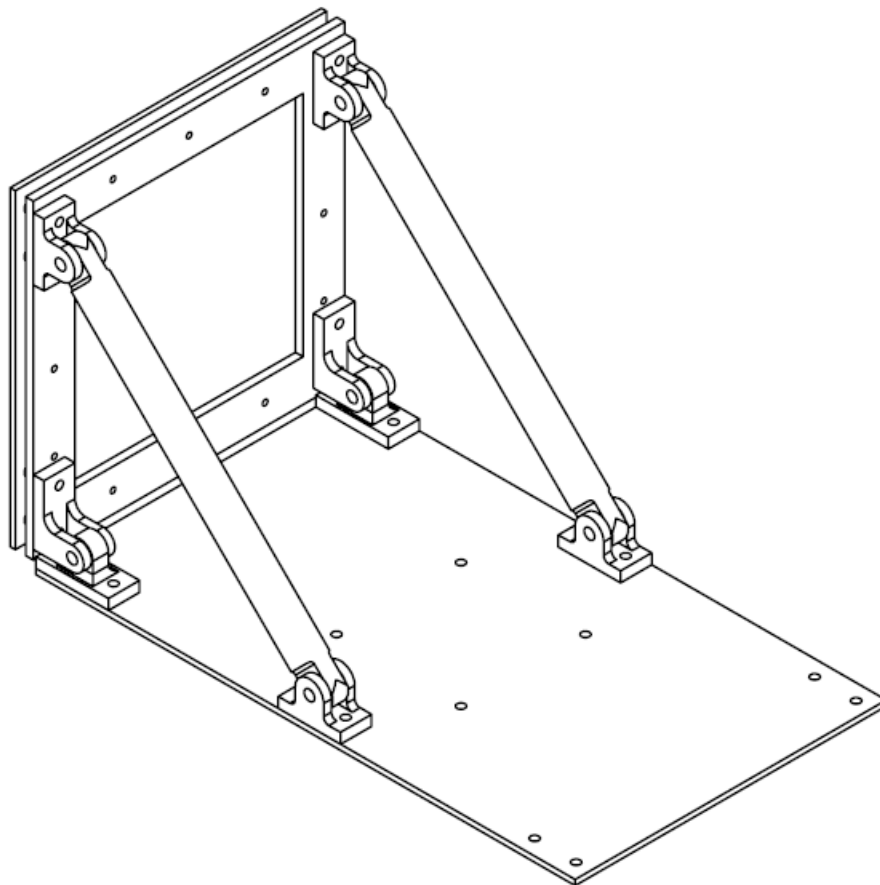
CAD Representation Of Large Projectile Test Fixture (AMRDEC, 2012)
